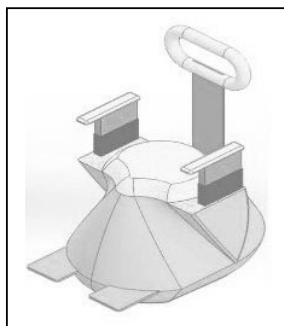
Assembly drawing for project TRI-OHM Futuristic PMA using CAD.
